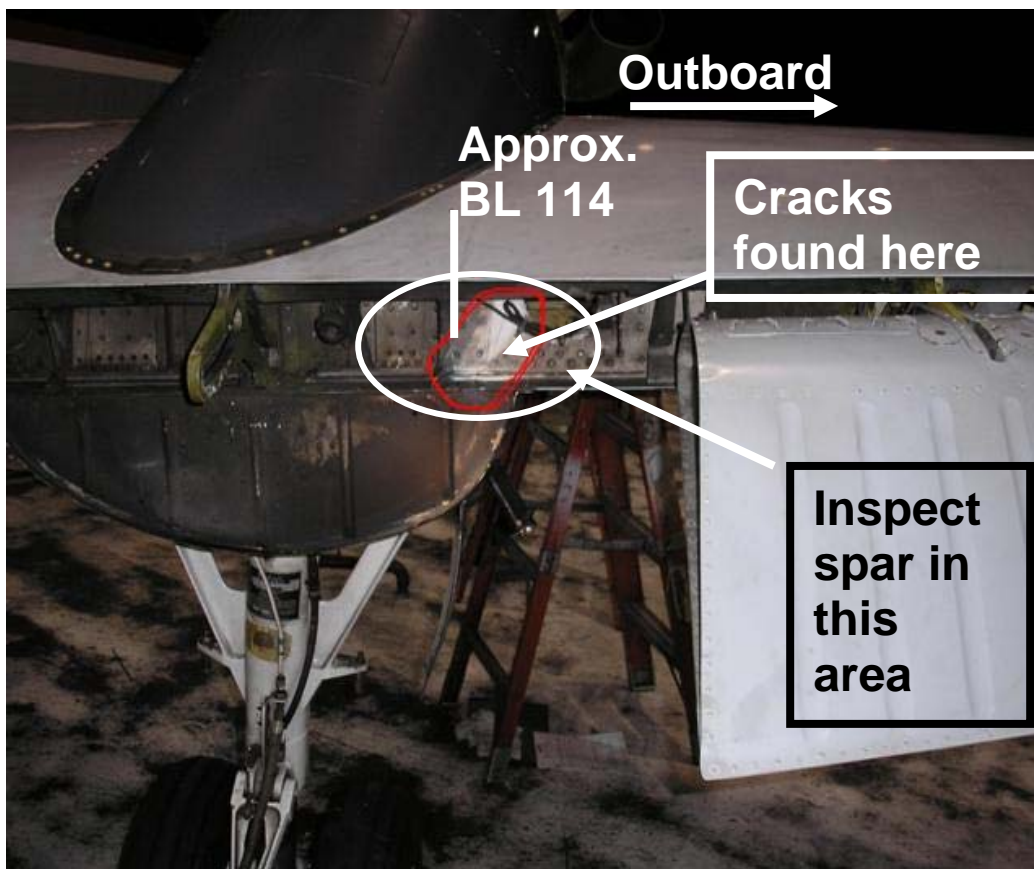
View of R/H wing rear spar at BL 114 area looking forward (The inboard flap is removed in this figure, but removal of the flap is not required to do the inspection).
